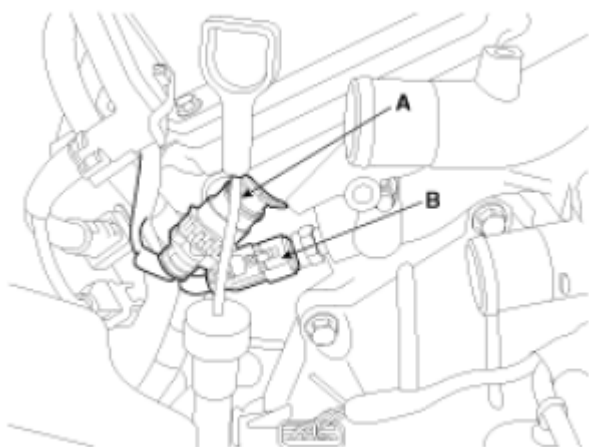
Identifying Bank 2 CMP Sensor Connector And ECT Sensor Connector
